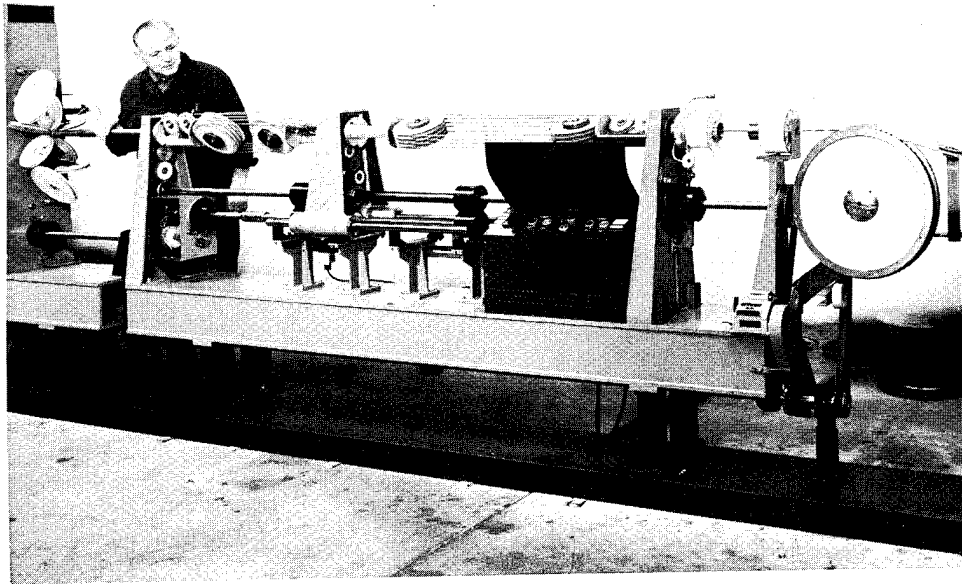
SZ stranding equipment for producing a basic unit out of star quads fabricated in same operation (refer to Fig. 14)
